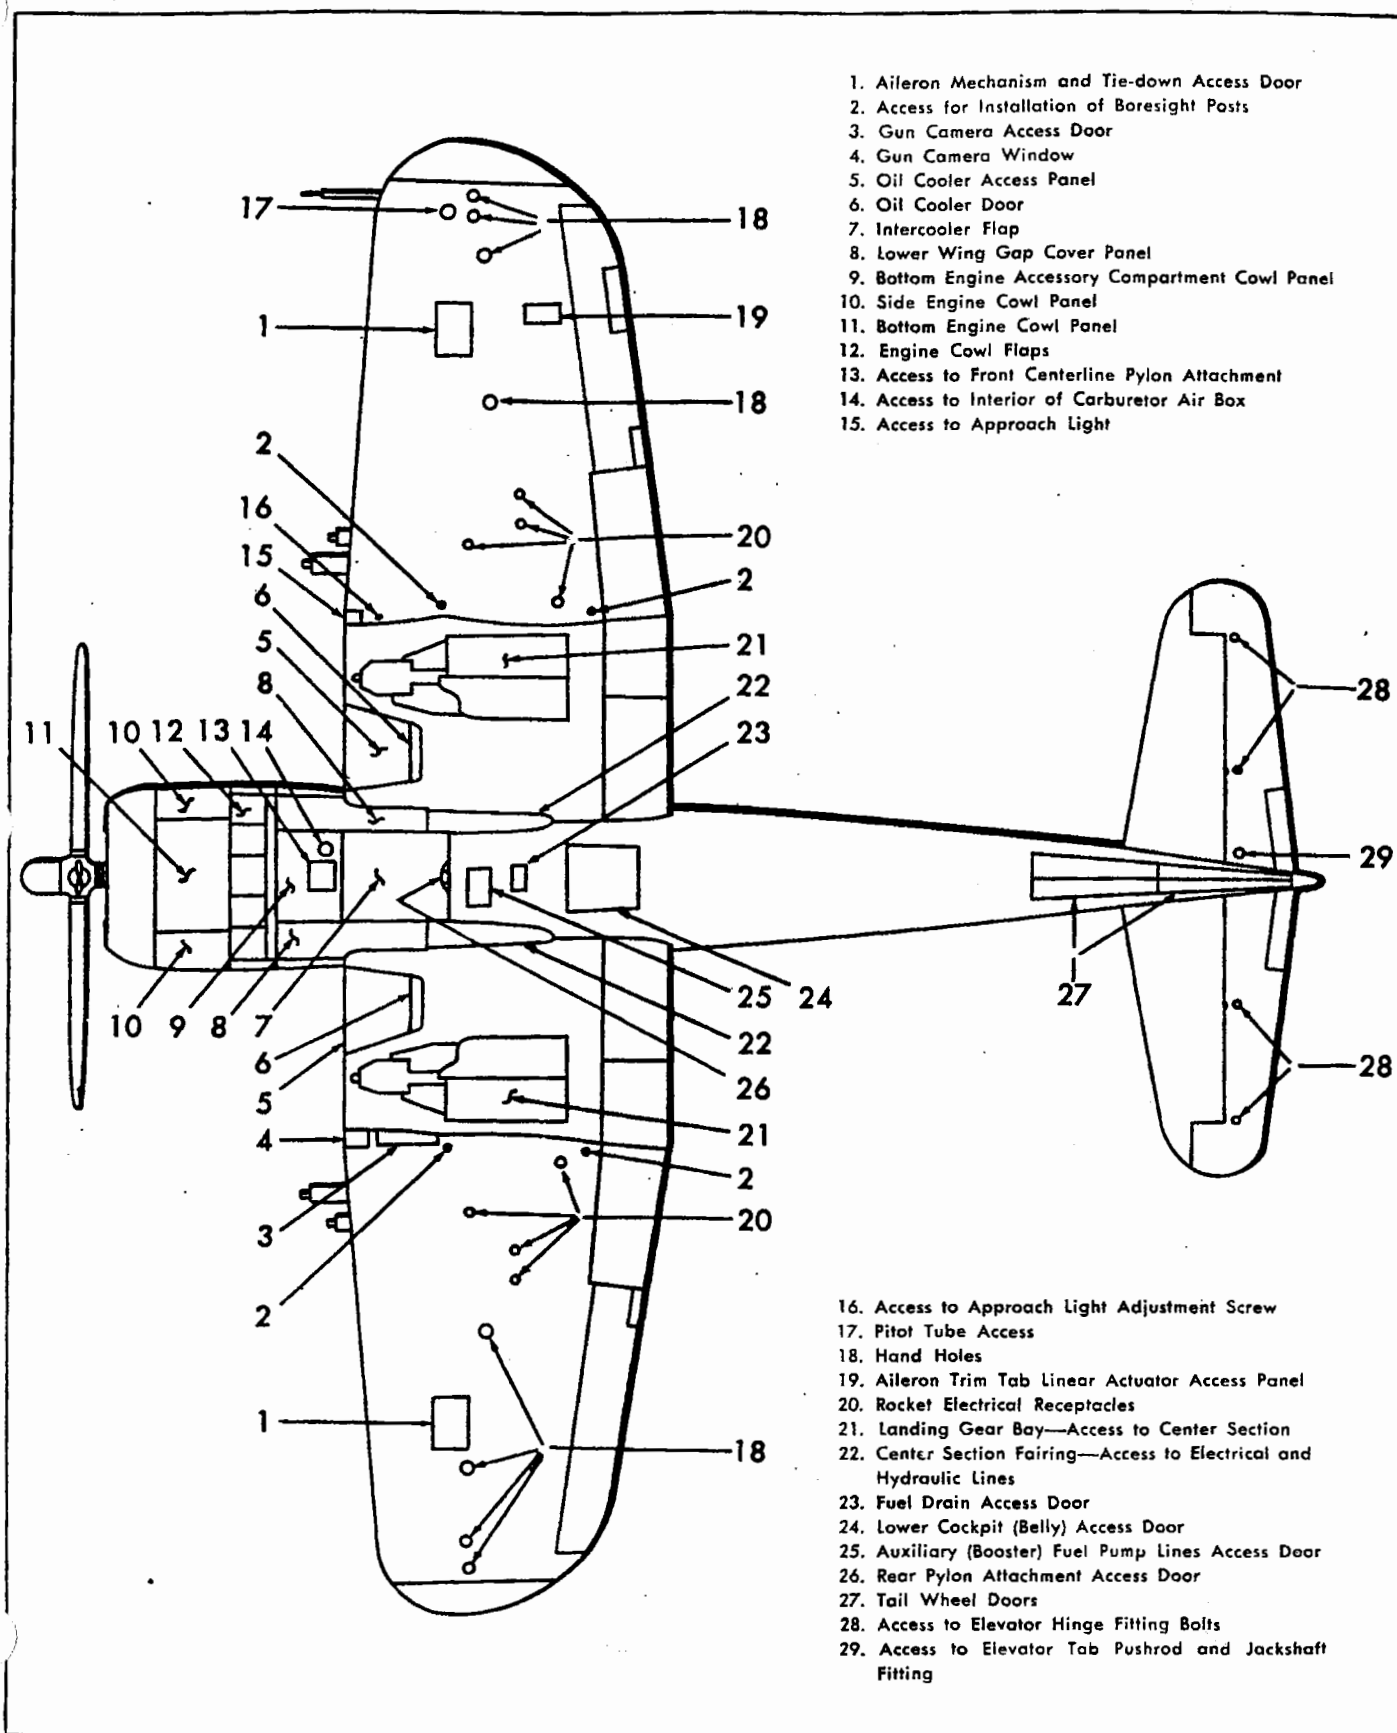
(Sheet 2 of 4 Sheets). Access and Inspection Provisions — Top View.
